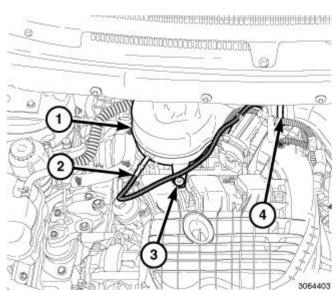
Upper Intake Manifold & Bolts Courtesy of CHRYSLER GROUP, LLC
